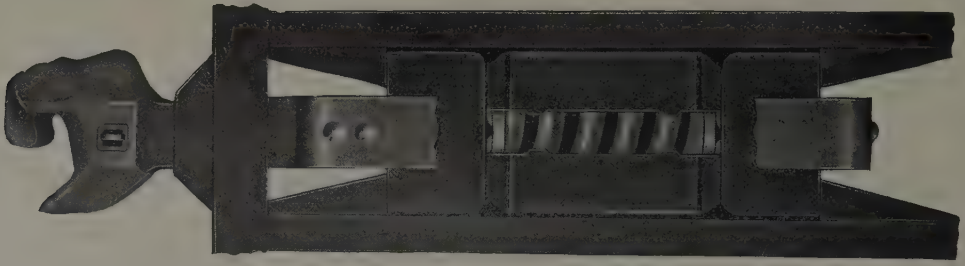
Murray Cast Steel Friction Draft Gear Applied with M. C. B. Riveted Yoke.
